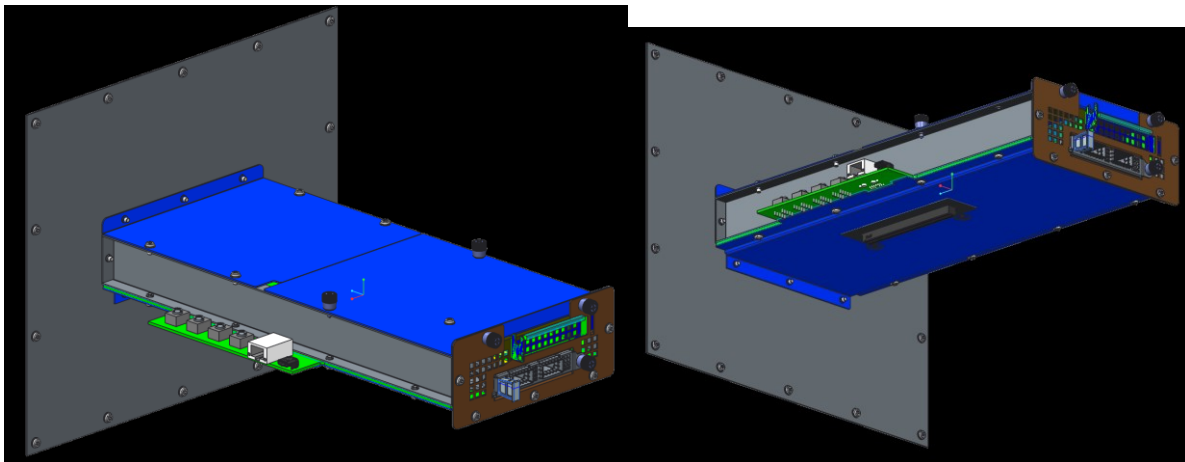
SFF Thermal Test Fixture Preliminary Design – Cover Removed
